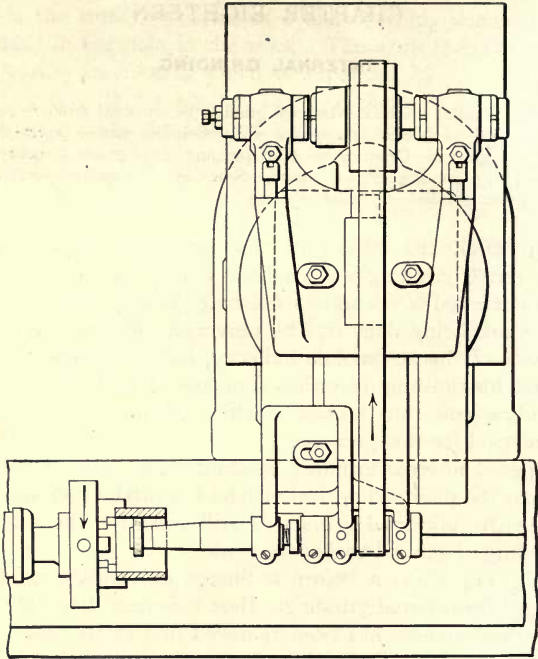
Brown & Sharpe universal grinding machine arranged for internal grinding.
